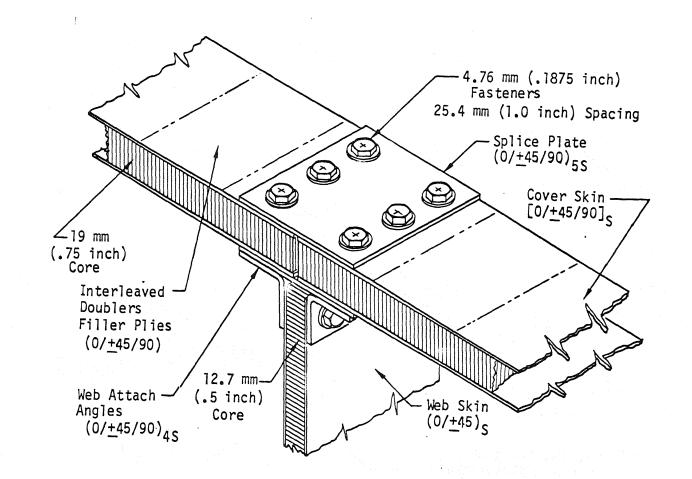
FINAL DESIGN TYPE 1 BONDED JOINT
